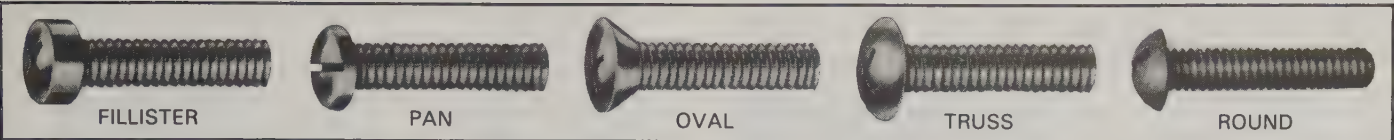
Machine screws are available with many different types of heads. (RB&W Corporation)
